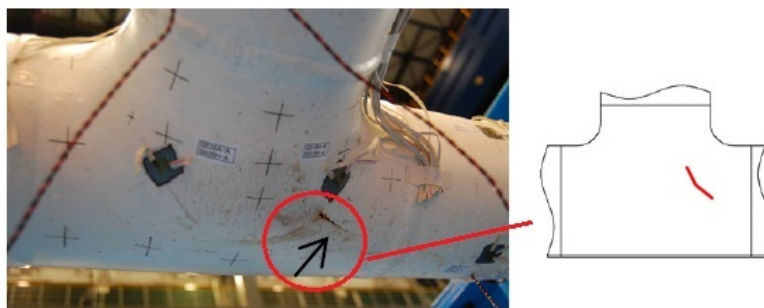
Crack in a Tee joint under shaking table test carried out by Nakamura et al. (2011).
